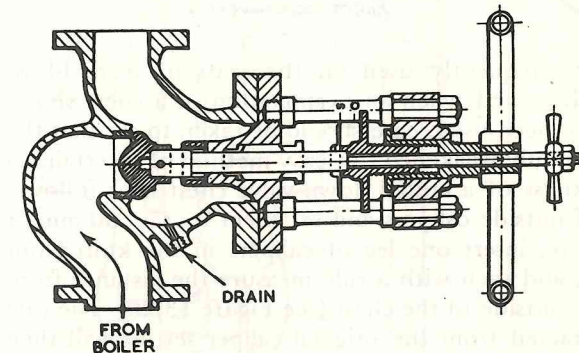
Cast steel self-closing main stop valve for water tube boilers
